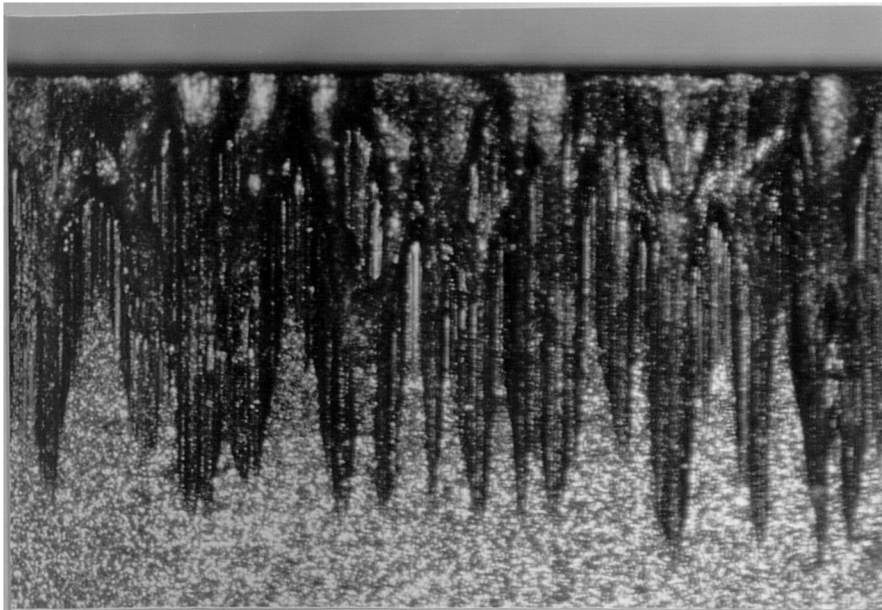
View of the flank face of CC620 tool x90 when used in dry machining of Waspaloy  $V=150\text{ m min}$ ,  $F=0.125\text{ mm/rev}$ ,  $\text{DOC}=2.5\text{ mm}$
